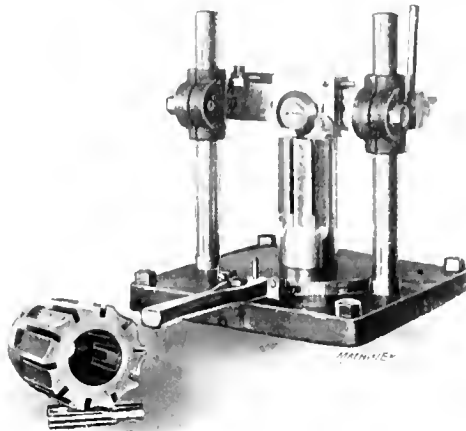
Fixture for Graduating on the End of Reamer Bodies.
